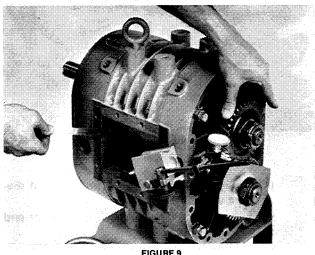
CHECKING TIMING GEAR BACKLASH WITH DIAL INDICATOR
